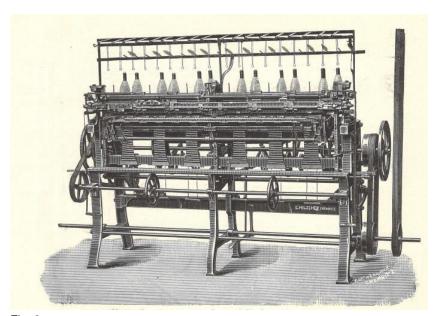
Paget Machine for striped stockings, (Worm 1927, 64).
